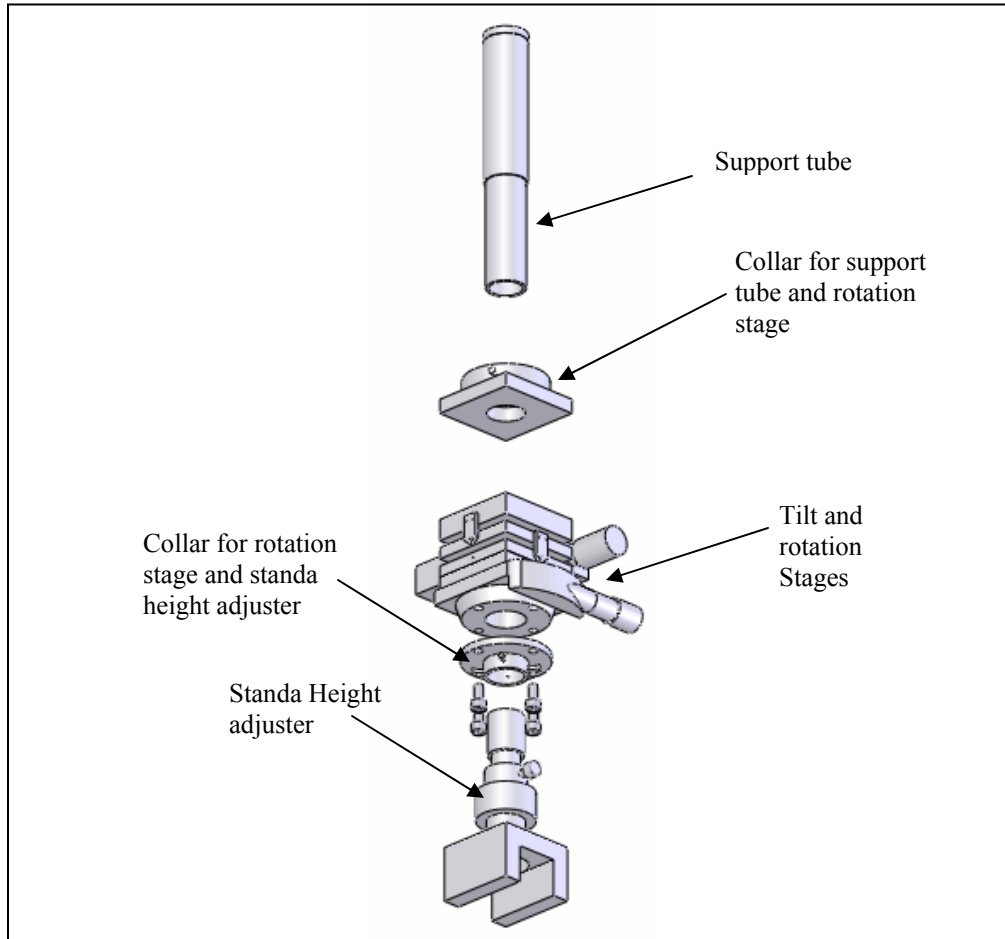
Components in the Tilt and Rotation assembly and how they attach together
